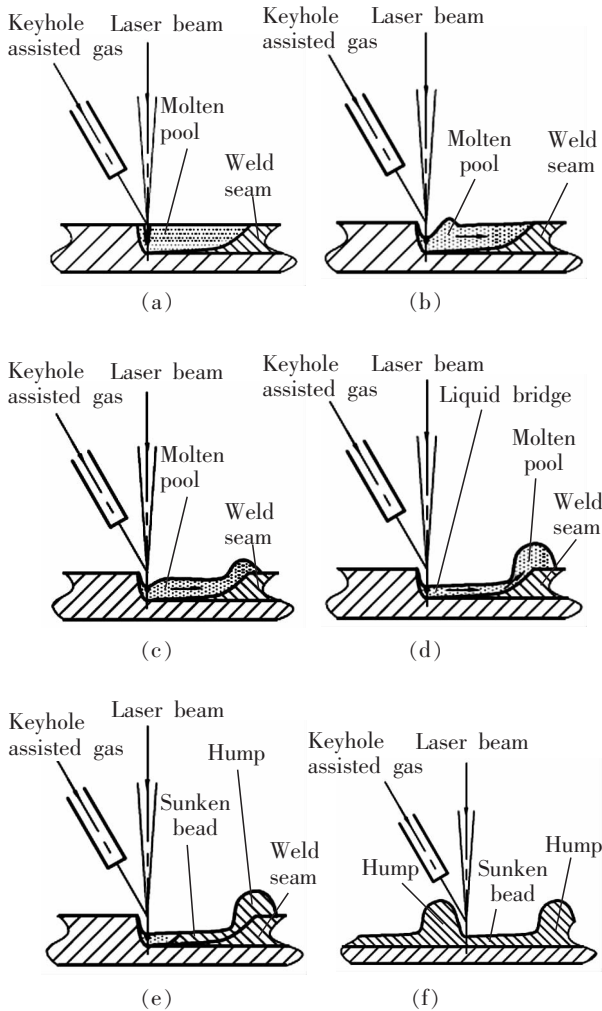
Six steps of hump formation in gas-jet-assisted keyhole laser welding (shielding gas is omitted)
